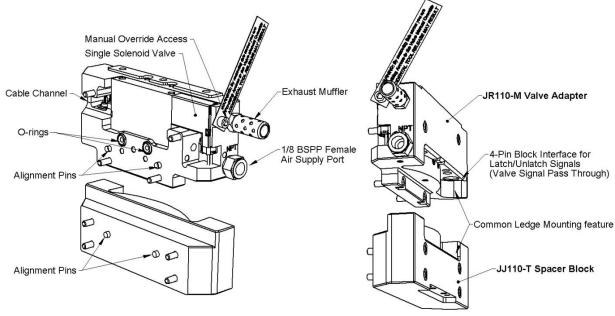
Jx110 Valve Adapter and Spacer Block (JR110 Shown)
